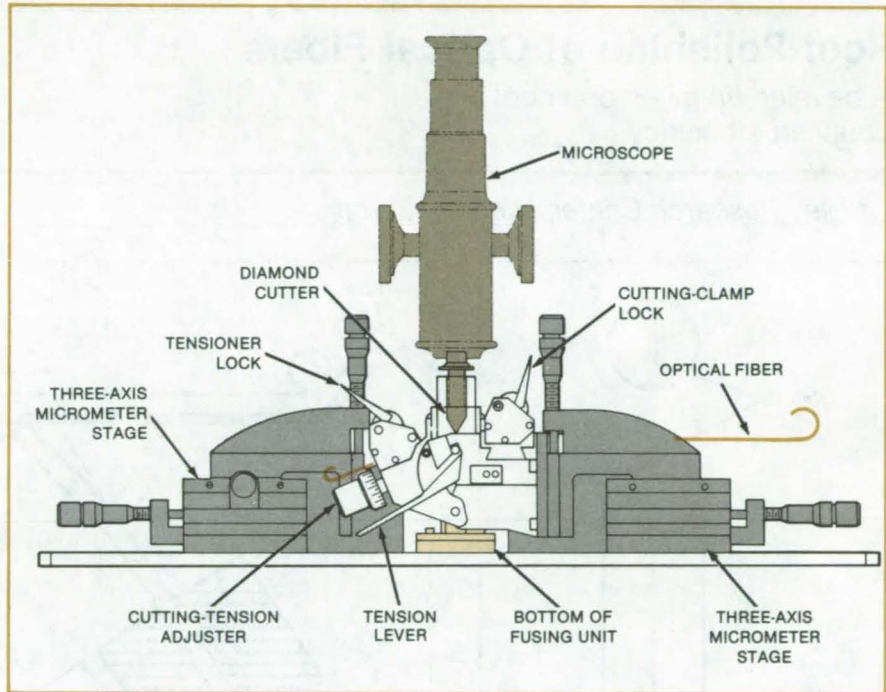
The Optical-Fiber-Welding Machine includes all the equipment needed to join two glass optical fibers.
